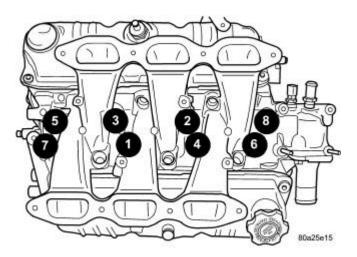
LOWER MANIFOLD TIGHTENING SEQUENCE Courtesy of CHRYSLER LLC
